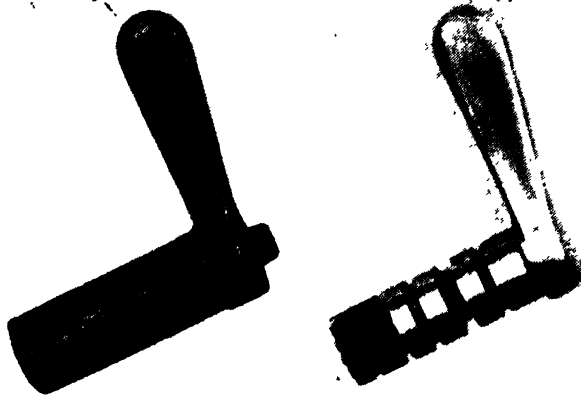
Index-plunger operating handle (forging and finished parts).
